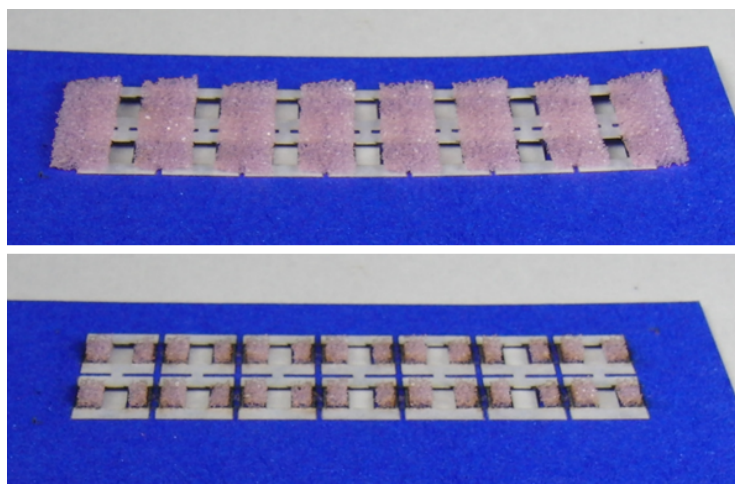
(Top) Foam strips laminated down onto exposed adhesive regions. (Bottom) Inner foam walls laser-cut from foam strips.
